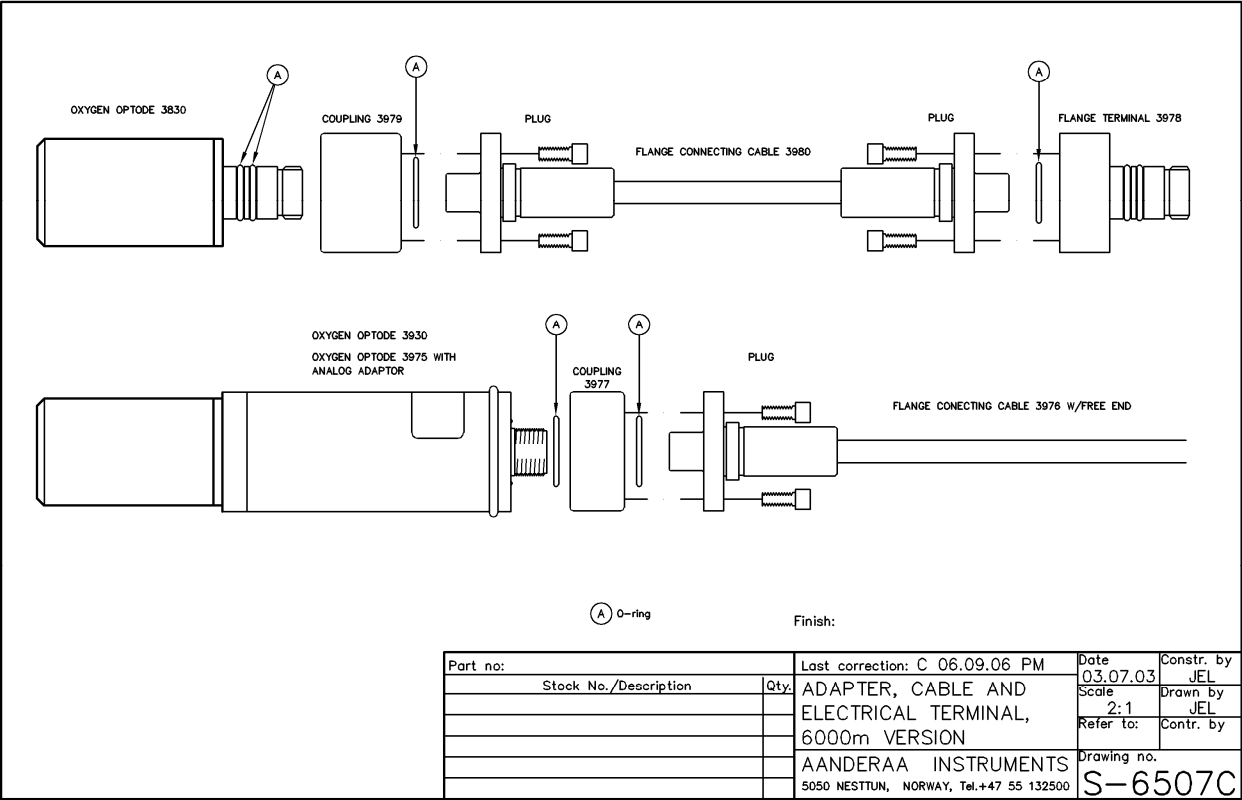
Assembly drawing of cable connection for deepwater version (1000-6000 m)
